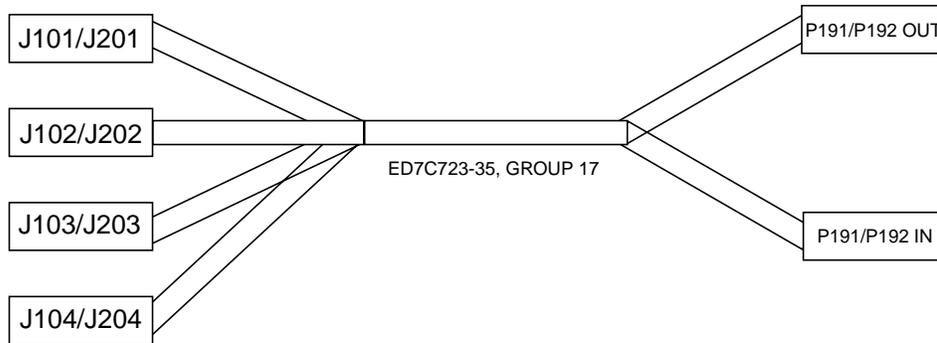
Cable Assembly ED7C723-35 Group 17
